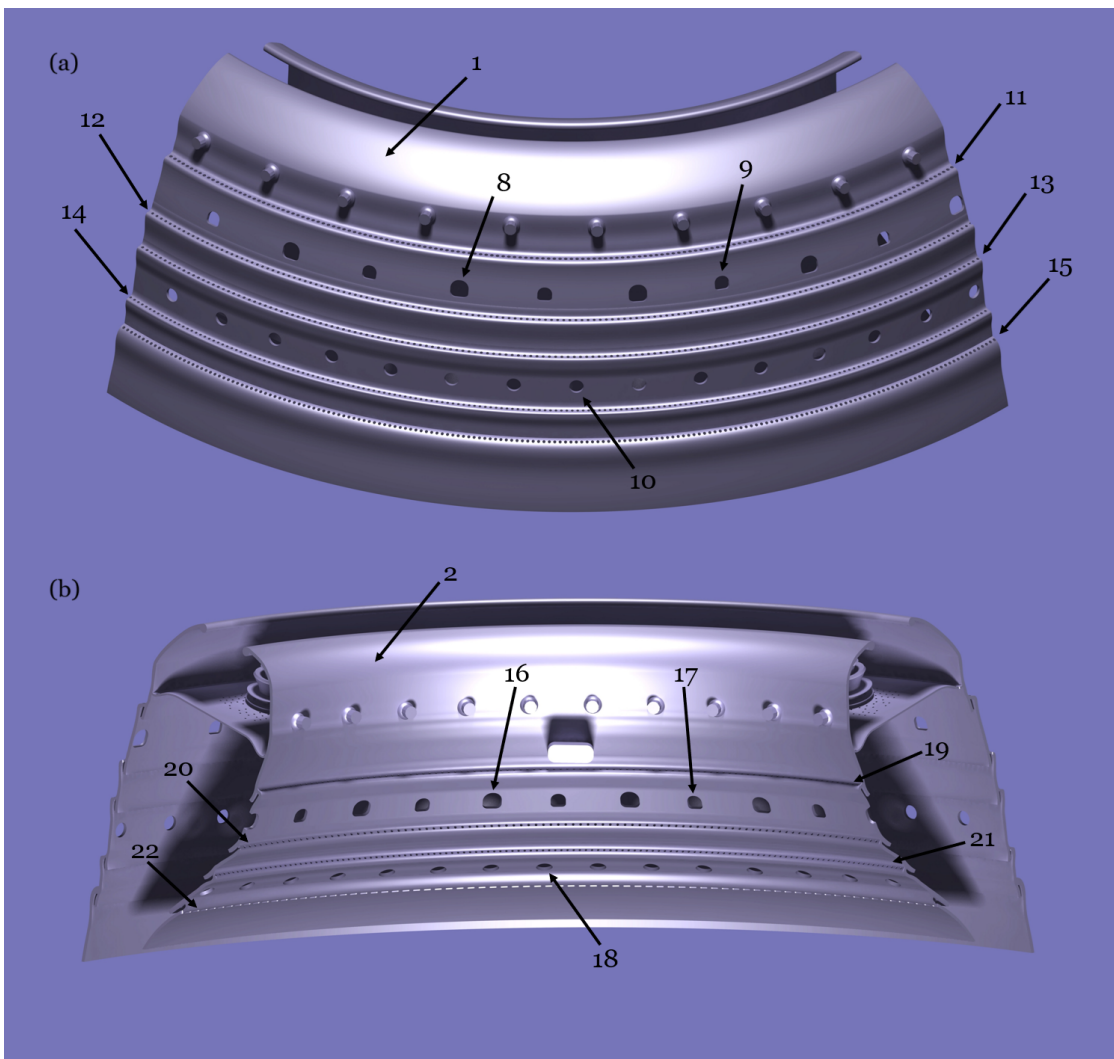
Views of the CAD combustor model: (a) outside view, (b) inner view.
